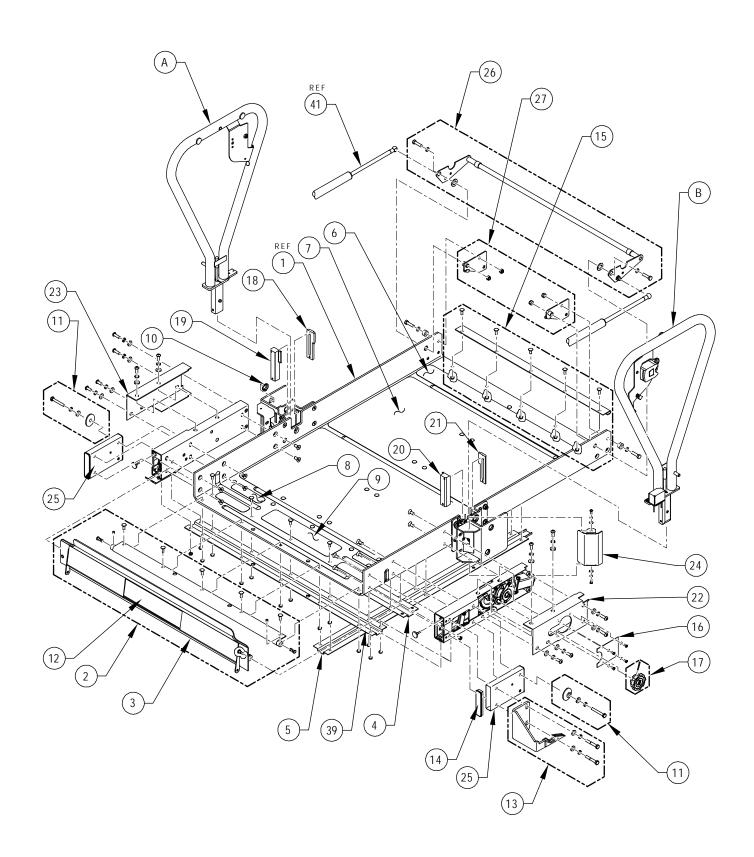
F10X-SERIES PLATFORM ASSEMBLY (SHEET 1 OF 2)
